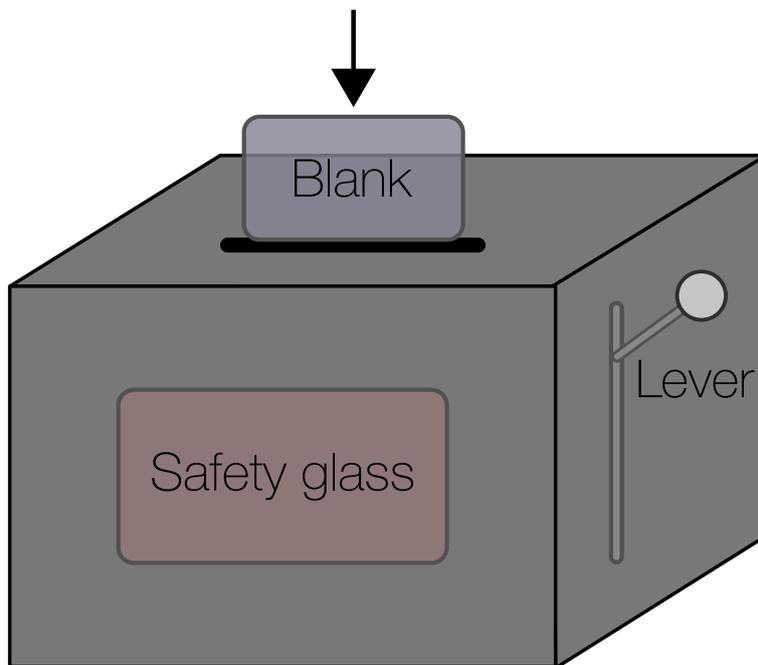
A card slot affords inserting a card as workpiece into the machine. The lever is used in order to lock the card. The safety glass allows observing the manufacturing process.
